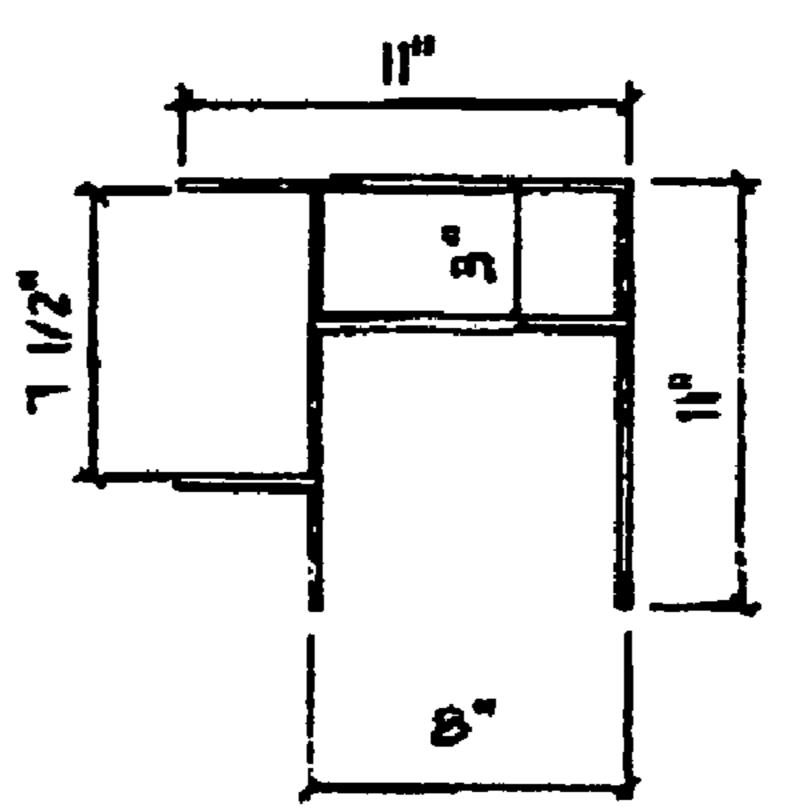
1/4" FLANGE DESIGN SUTT JOINT CONECTION CORNER CONECTION
